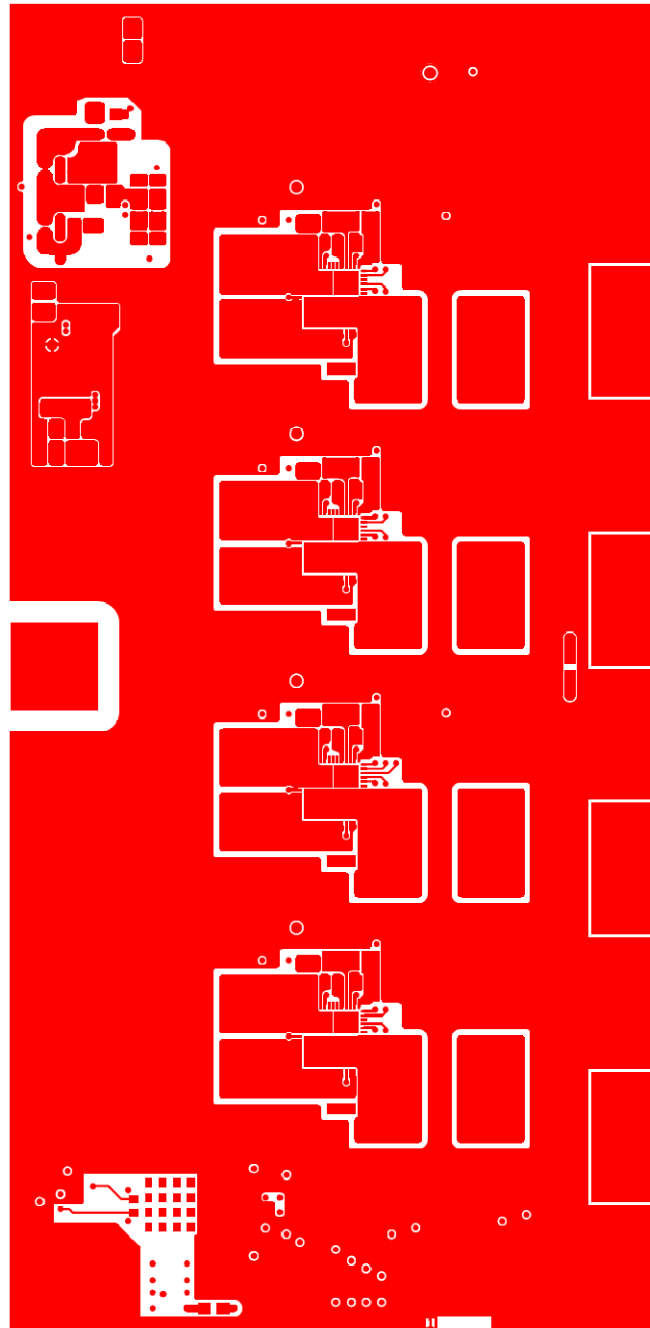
PCB design of top layer corresponding to the test board of Figure G.3.1.
